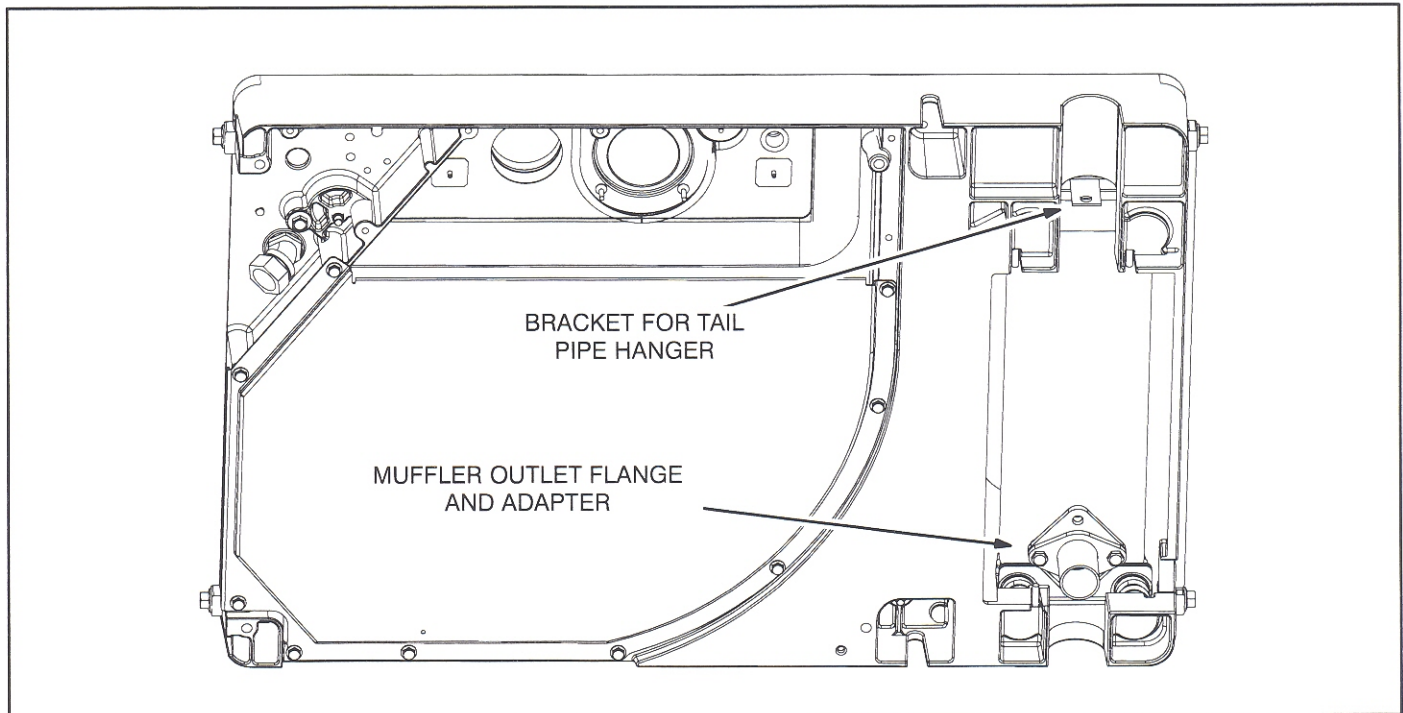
OUTLET FLANGE AND ADAPTER ON MODELS WITH INTERNALLY MOUNTED MUFFLERS
